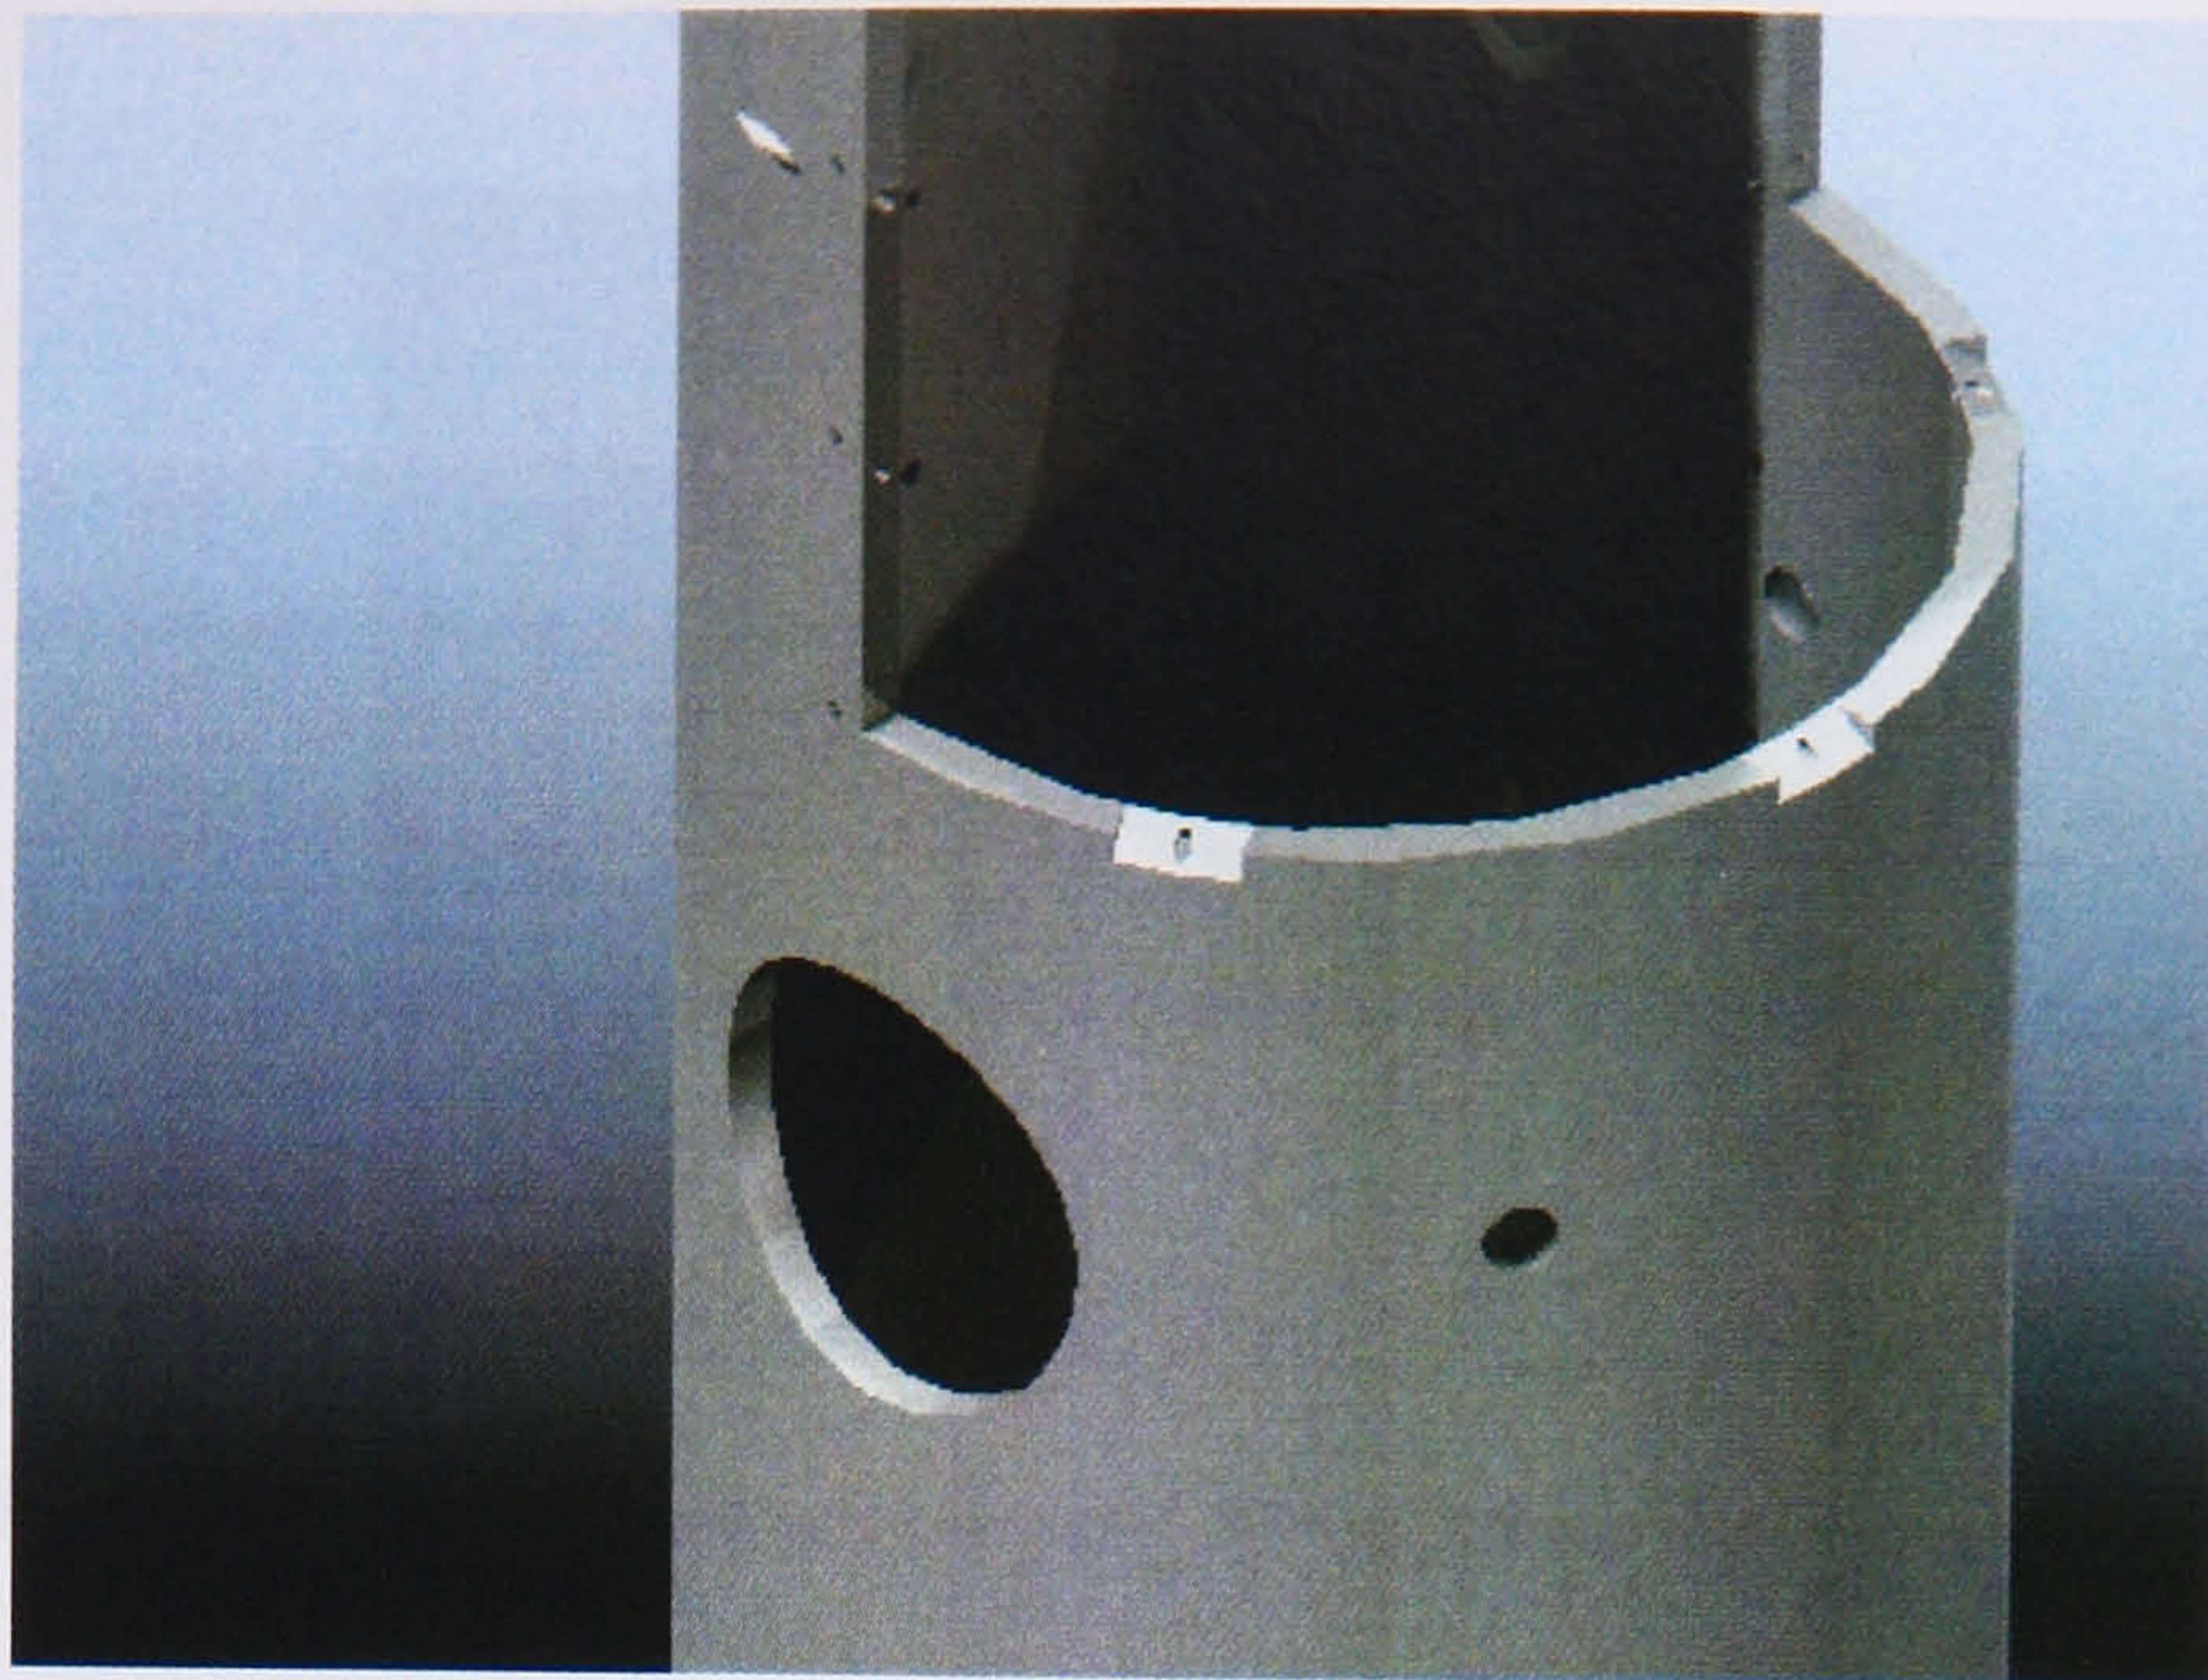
Solidworks rendering of body showing close up detail of the wedge cuts, vacuum pump hole and bolt holes to secure against vacuum tank walls.
